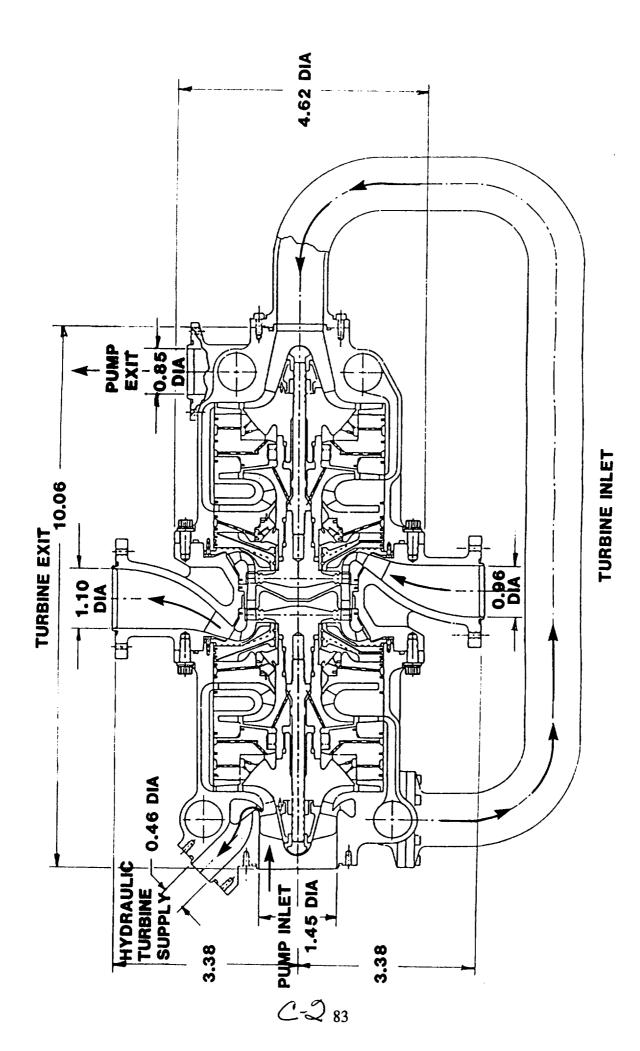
Preliminary Design OTV, 7500 Pound Thrust Engine, High Pressure Fuel Turbopump
